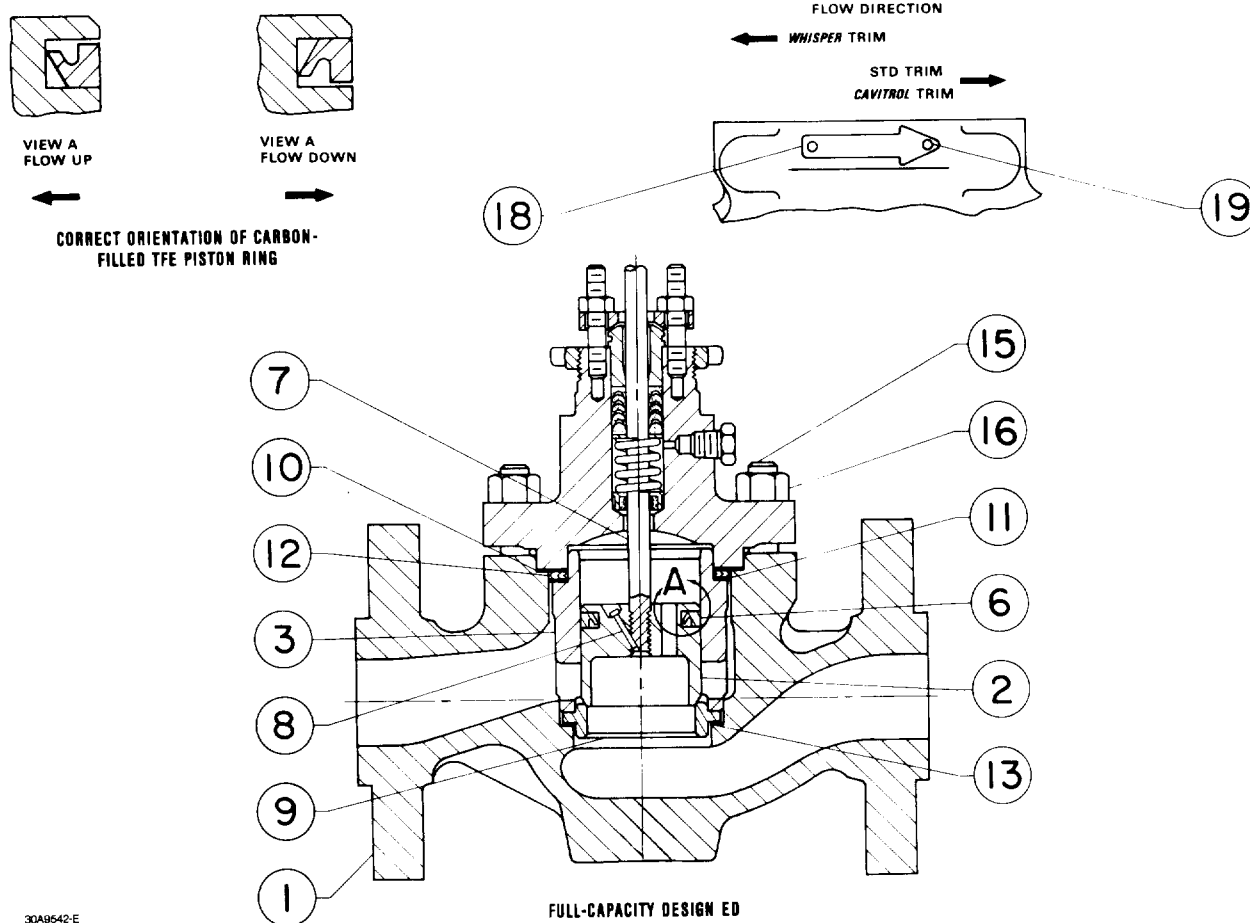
Standard 1- Through 6-Inch Design ED, and EAD, Body Assemblies
